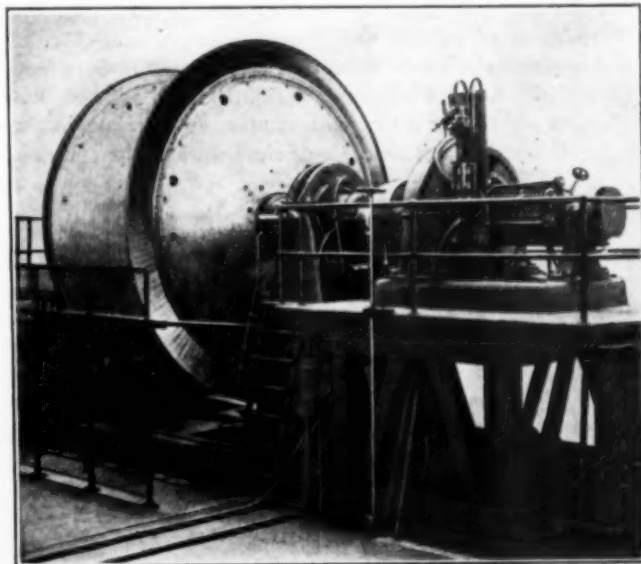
TYPICAL HORIZONTAL BALANCING MACHINE
